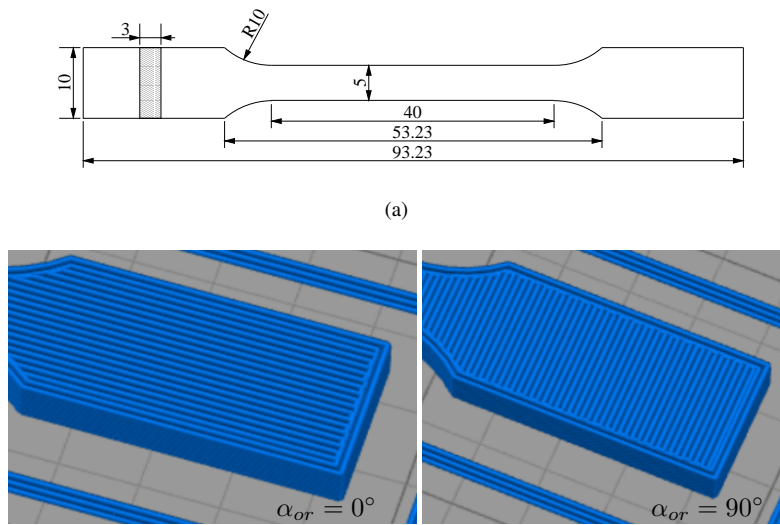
(a) Tensile test specimen dimensions in mm. (b) Close-ups of infill orientation angle.
